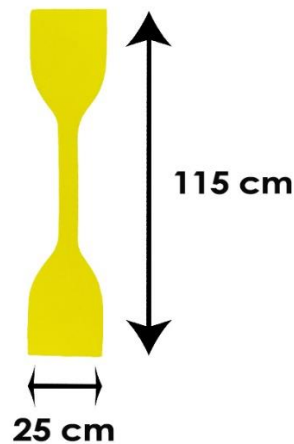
Dimension of dumbbell specimen cut from Die C standards according to ASTM D412 method
